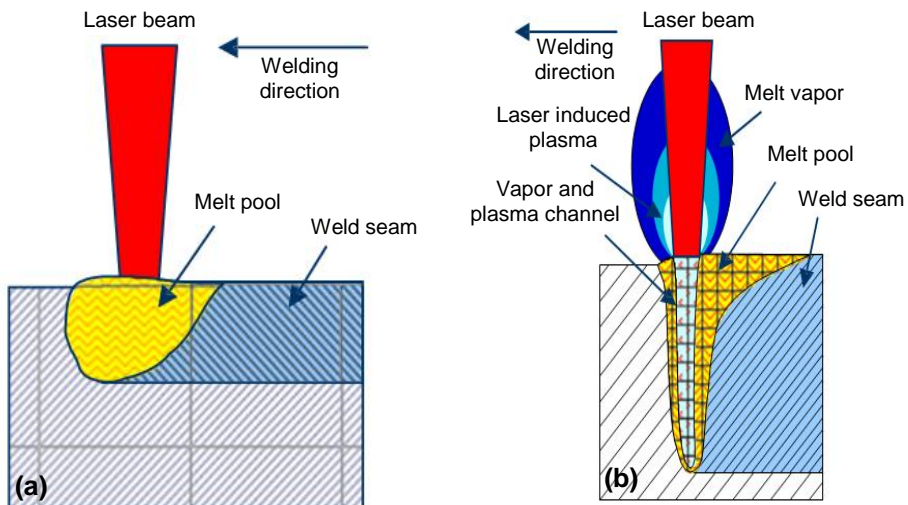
Modes of welding with laser: (a) conduction and (b) keyhole welding
